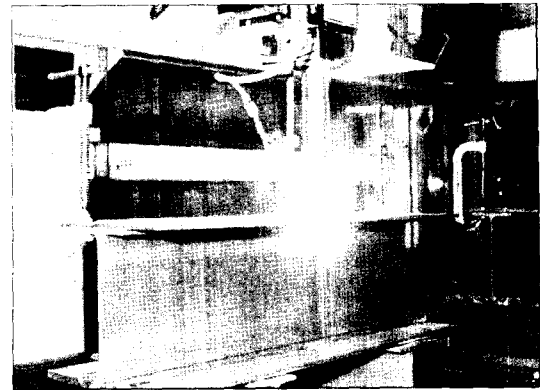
Application of laser welding in manufacturing a bridge structure
